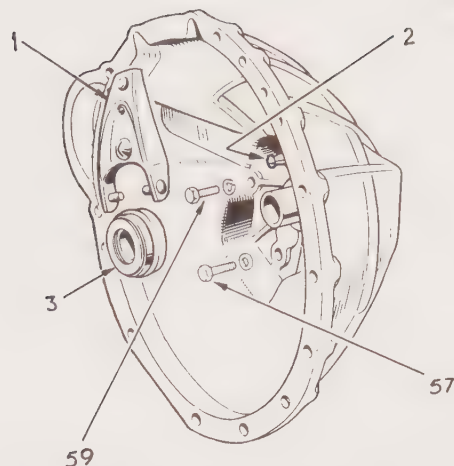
10 Clutch withdrawal lever and parts, 6-cylinder cars.
